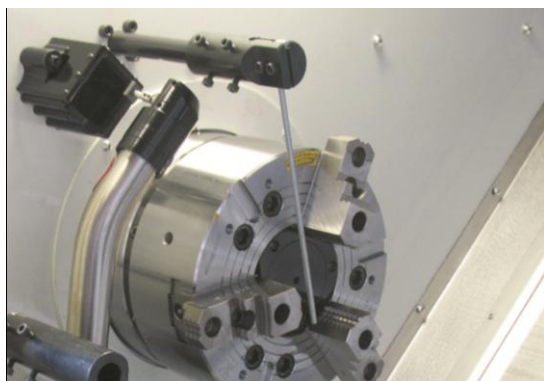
HT fit with 3-jaw hydraulic chuck,
